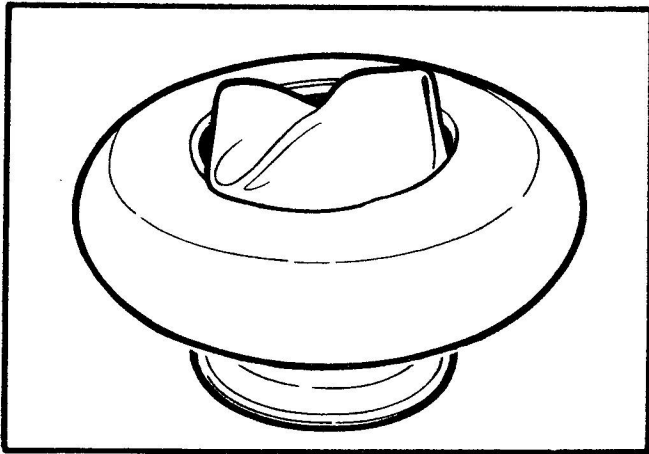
Position of Wheel, Tire and Tube Prior to Mounting Tube
